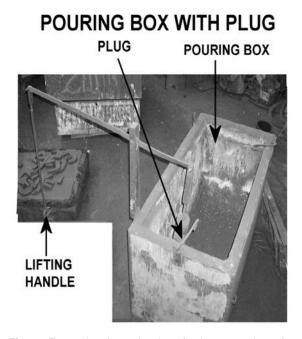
Example of pouring box for large castings (up to 10 to15 tonnes)
